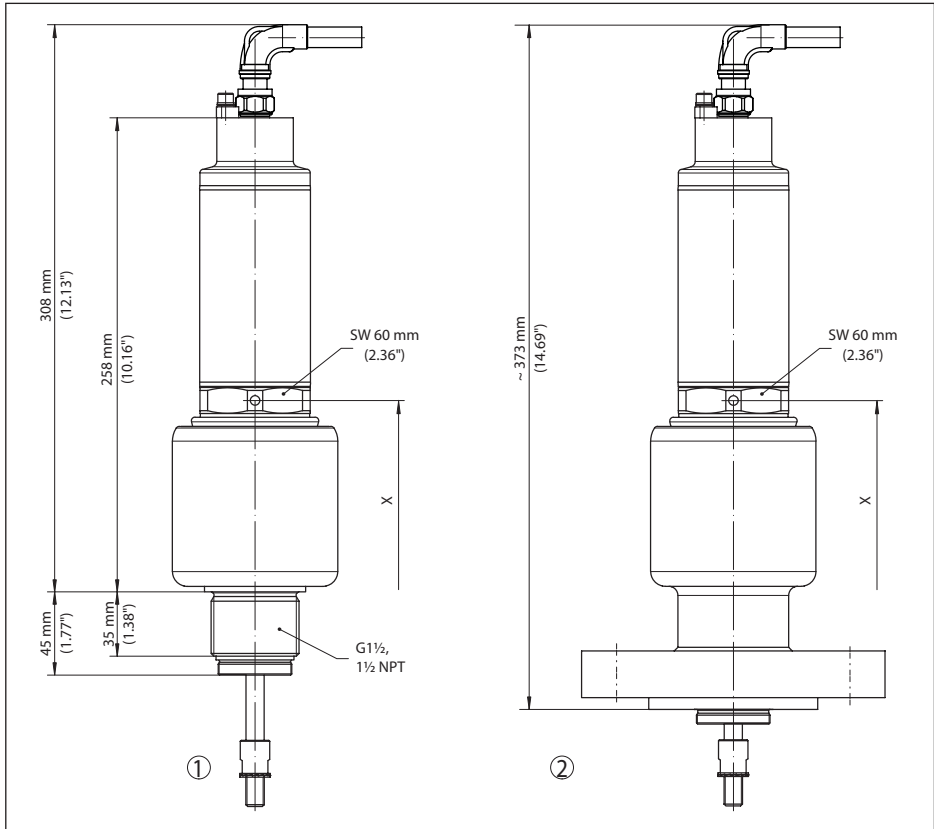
Sensor housing VEGAFLEX 86, 280 °C
